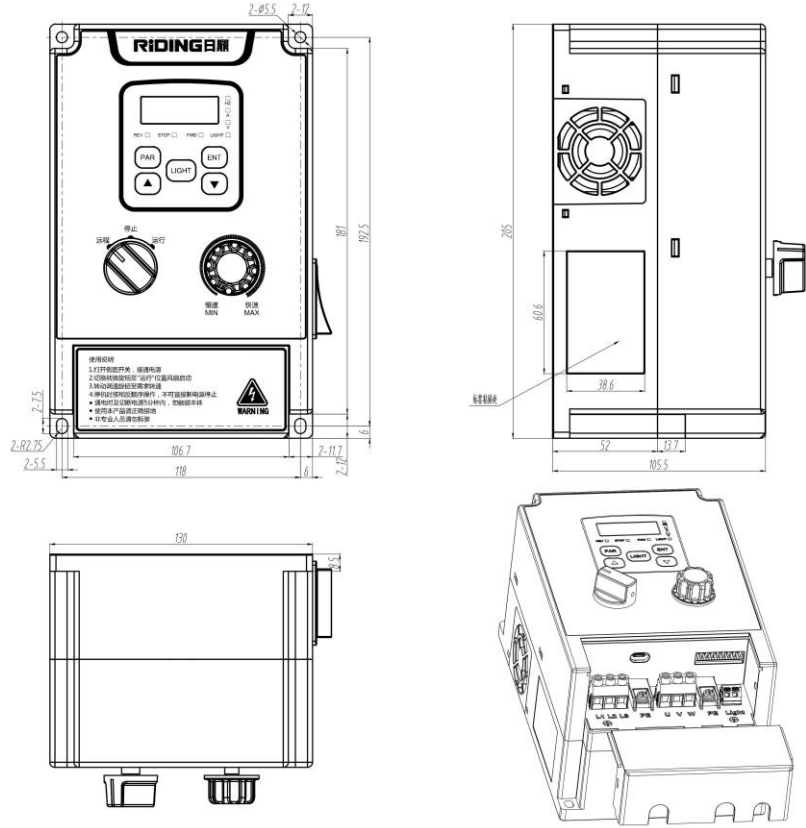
Schematic diagram of overall dimensions and installation dimensions
